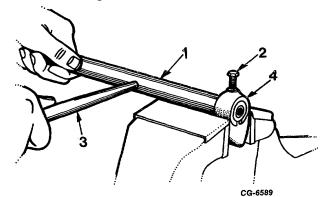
Turning Rocker Arm Shaft to Align Screw Holes
